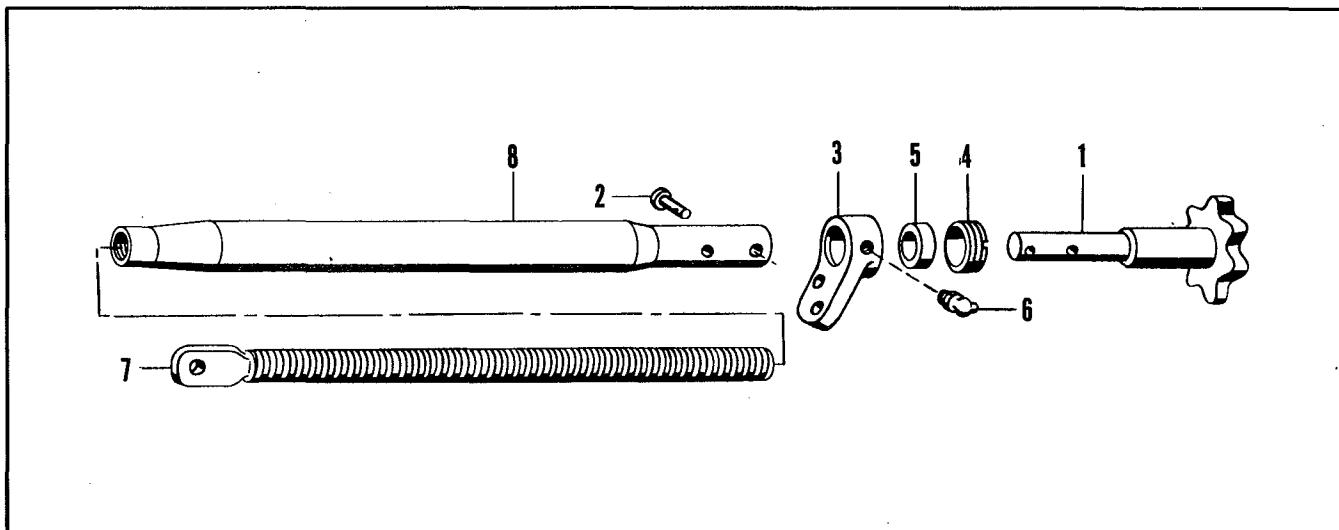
Rotation Adjustment Assembly, Part No. 105160
